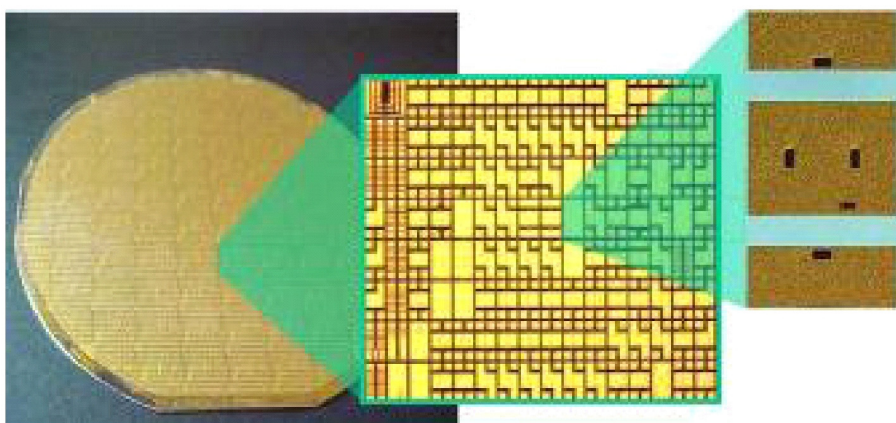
The basic wafer cap chip scale package fabrication process. Left shows an assembled six-inch cap and base wafer. Center shows the sawing process. Right is a bottom view of a resulting 0402 chip-scale packaged device.
